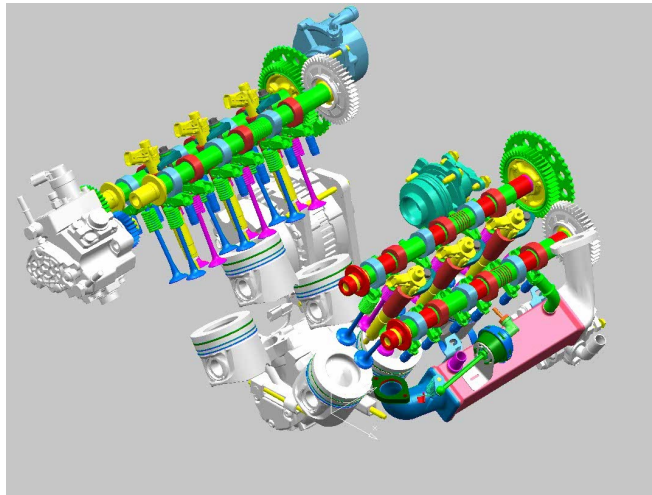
Commonality V6 dCi / M9R* (Bore & stroke, bore pitch, piston and combustion chamber, cylinder head module including cooling, intake and exhaust ducts, valve train, injector,...)
